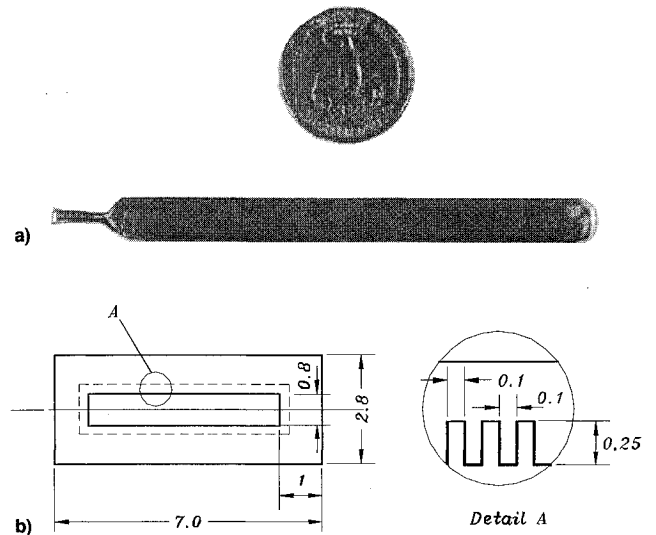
Sample of miniature heat pipes fabricated using the EDM wire-cutting method: a) overall dimensions and b) cross-sectional dimensions in millimeters.
